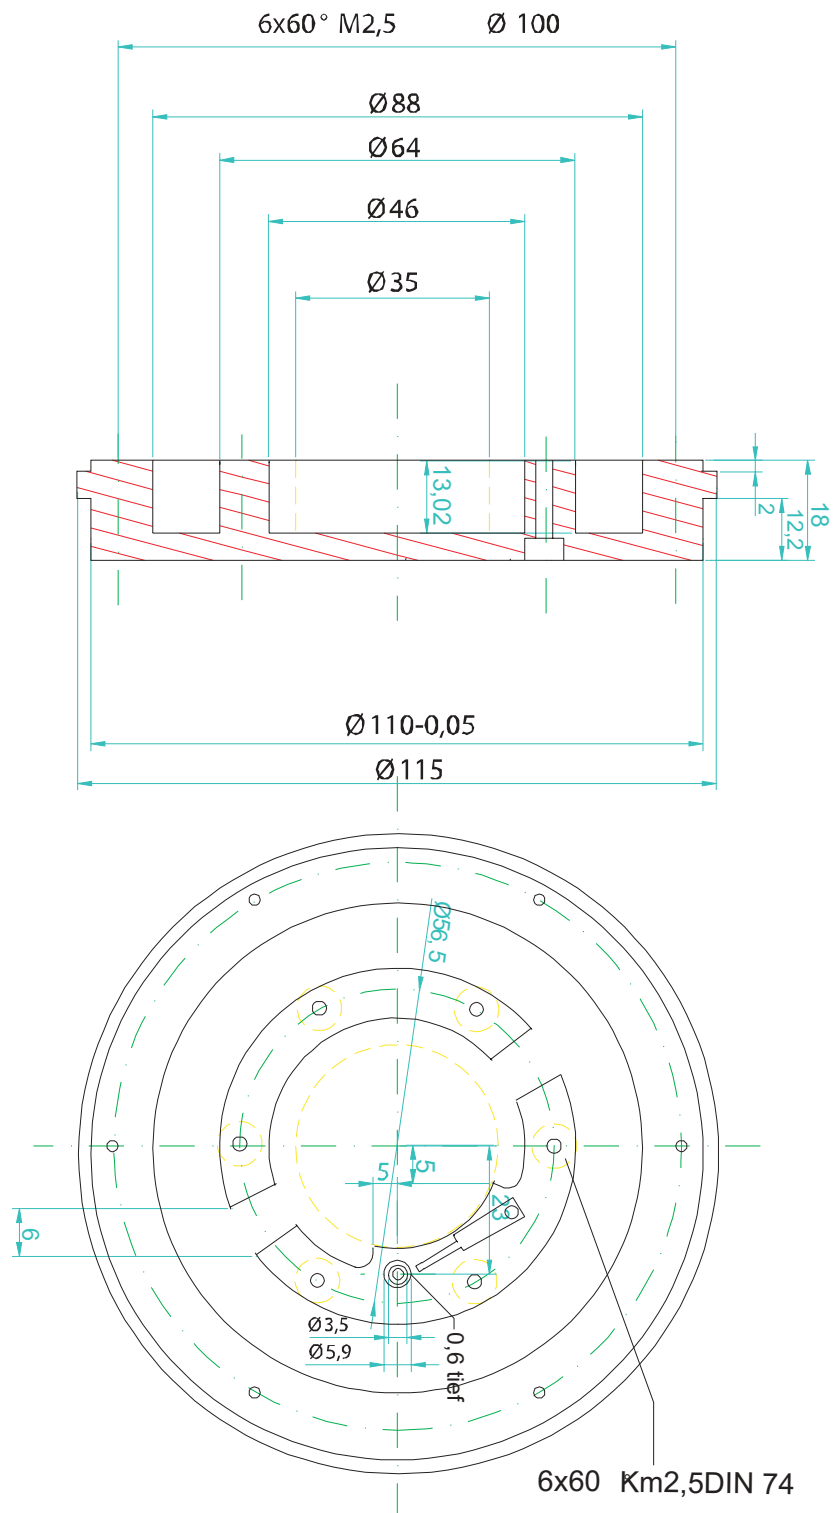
Base of the construction, holding the outer cup and the cooling jacket.
